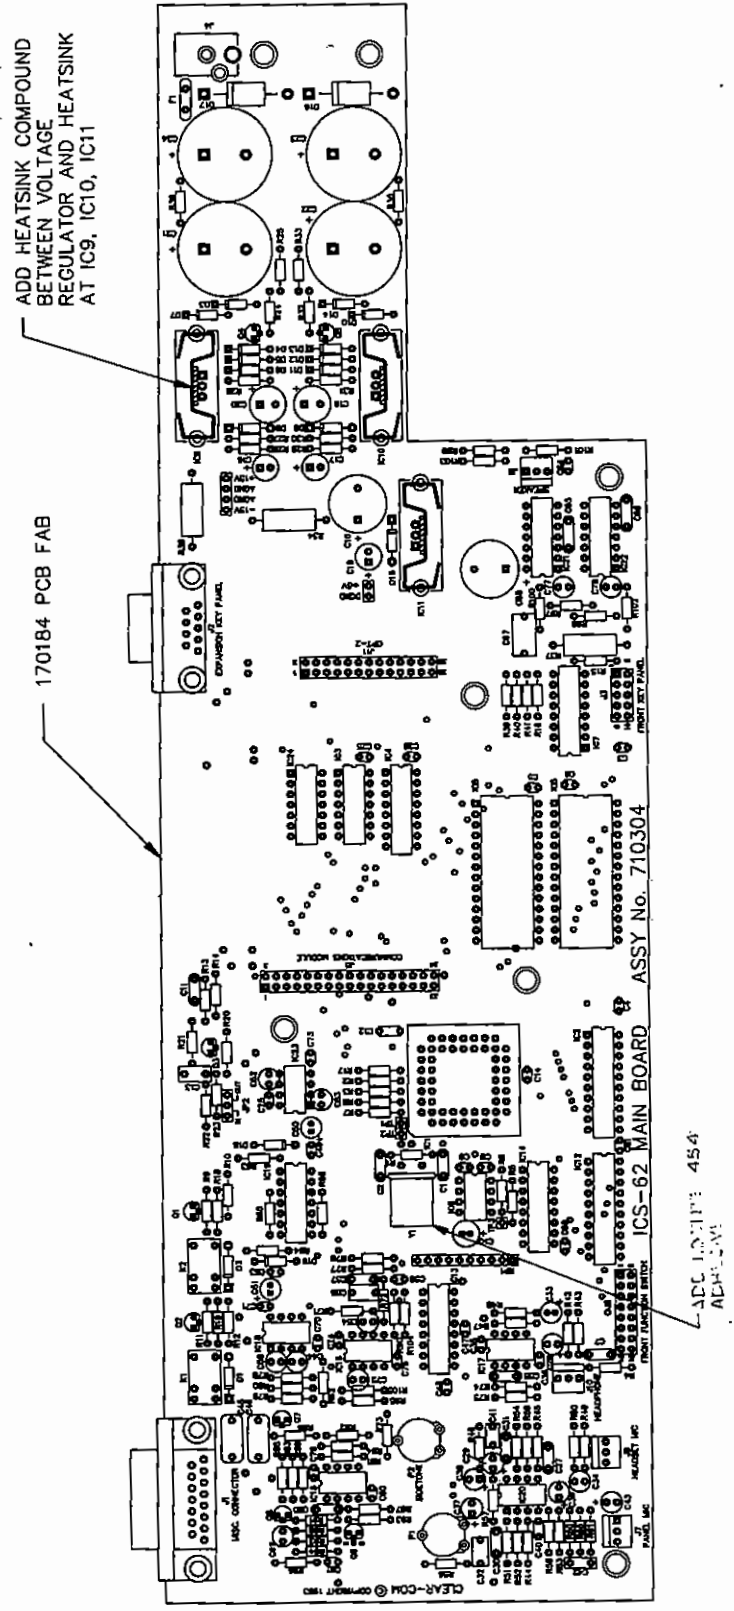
Assembly Drawing - ICS-62/ICS-102 Main PCB Rev. A
